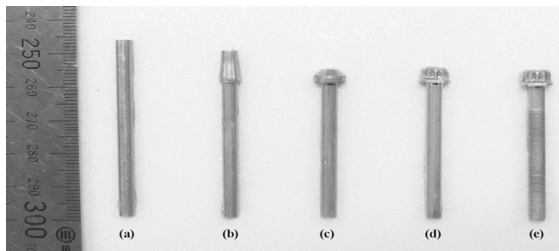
Three stages of the bolt-forming process for the fine-grained specimen: (a) initial specimen, (b) first preform, (c) second preform, (d) final heading, and (e) threaded bolt by thread rolling [53]
